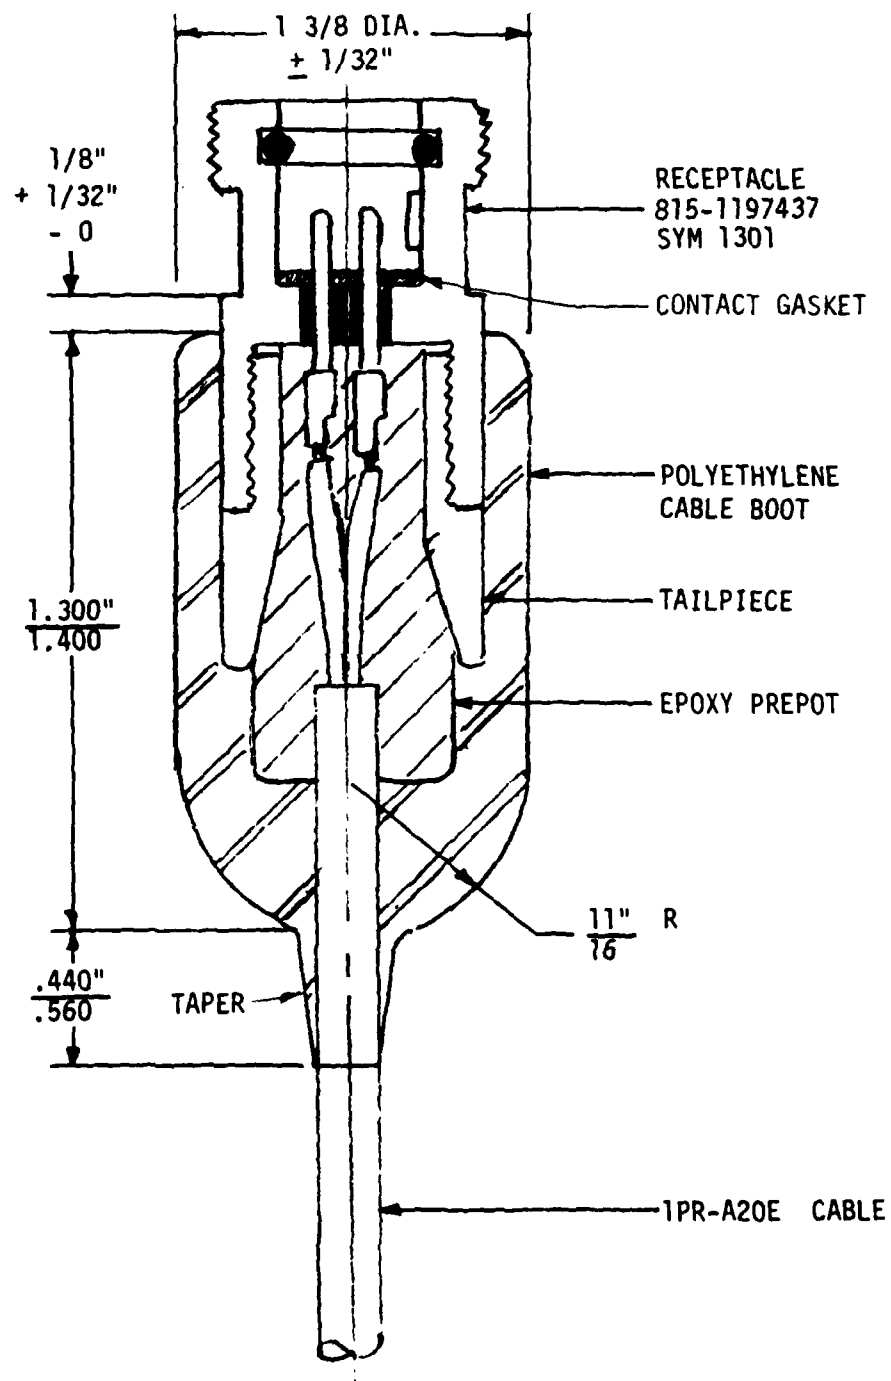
TRIDENT POLYETHYLENE MOLDED MIL-C-24217 CONNECTOR RECEPTACLE
